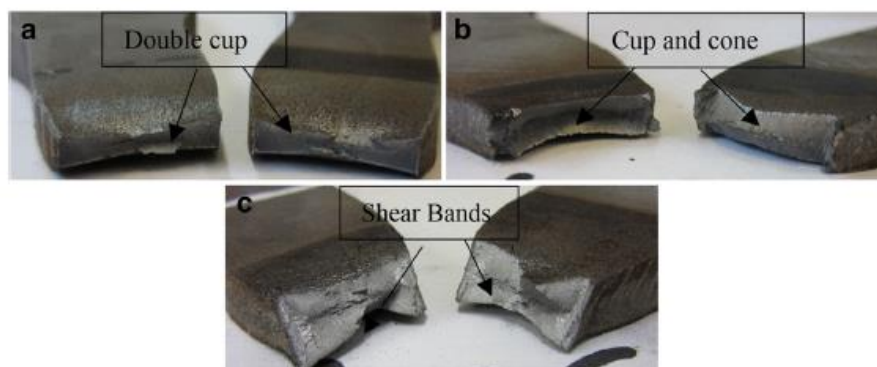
Ductile fracture modes of the welded joint (Kzasidis and Pantelis, 2017)
